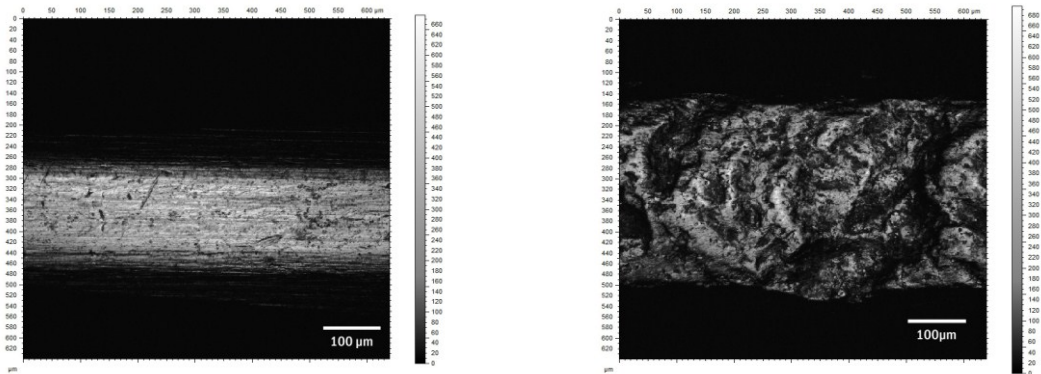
Thread crest of die A2. (Left) New thread. (Right) Used thread.
